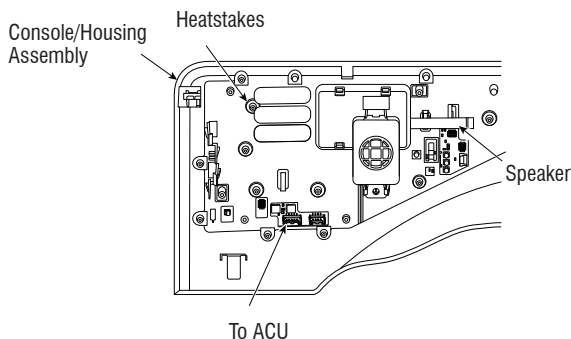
Human-Machine Interface (HMI), Console/Housing Assemblies
